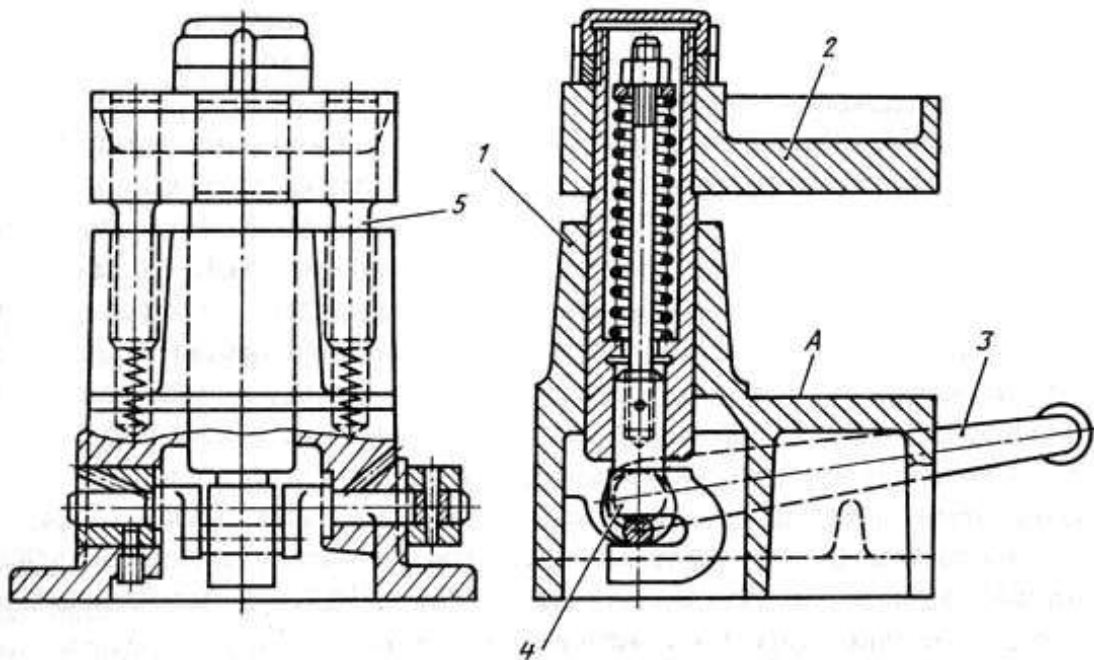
Standardised basic assembly unit of pump jig: 1 – housing; 2 – cover; 3 – handle; 4 – crankshaft mechanism; 5 – plunger
